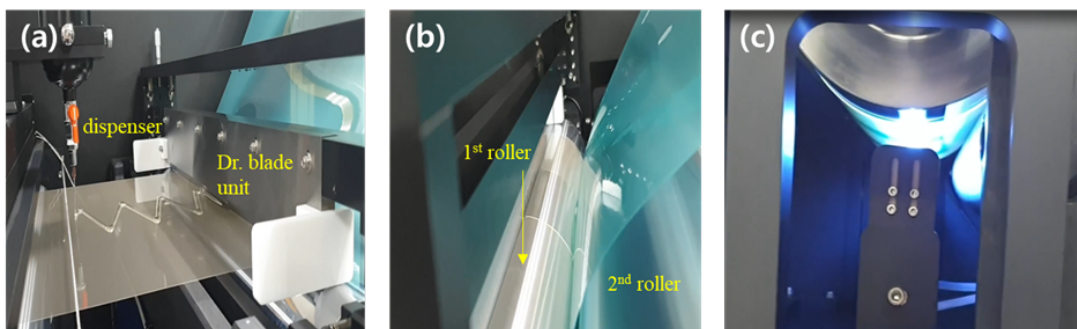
Magnified view for (a) coater of photo-curable resin, (b) laminator, and (c) UV exposure unit.
